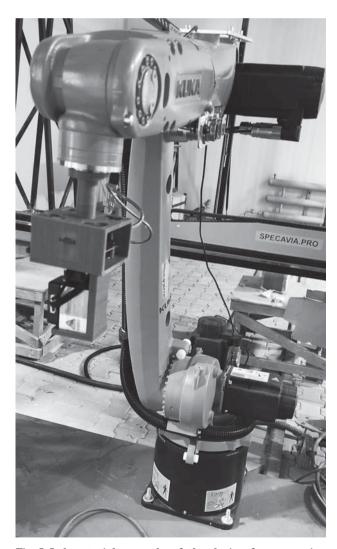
Laboratorial example of the device for measuring and martking, which was assembled on the industrial manipulating robot KR8 R1620 of Kuka Robotics company
